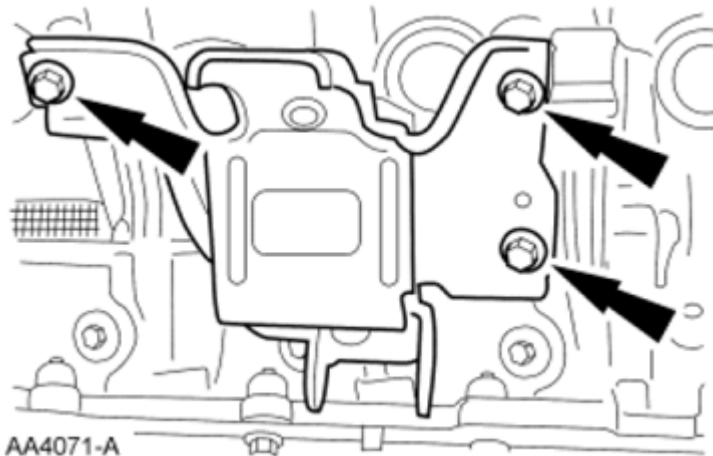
Locating Engine/Transmission Spacer Plate
